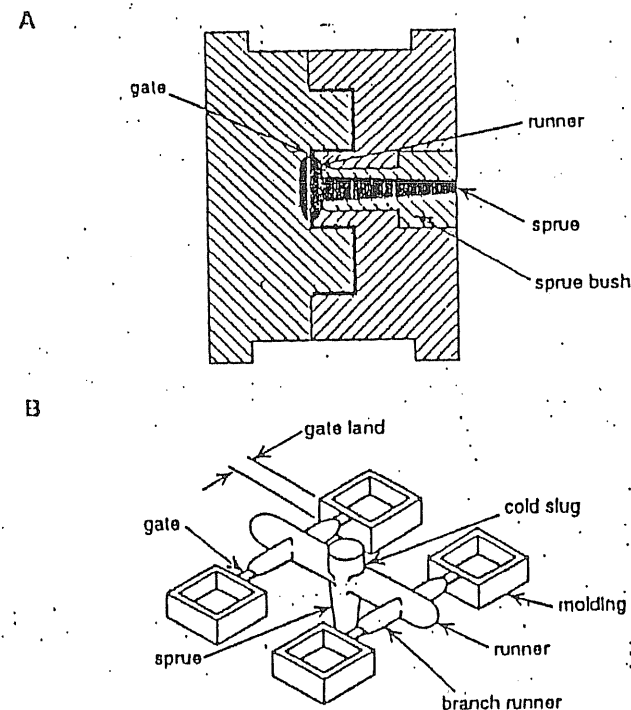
A. Typical mold design used in a 'multiimpression injection molding process for the production of plastic boxes in this example. B. Removed mold assembly showing boxes and plastic scrap (i.e., sprue and runners). (Adapted from N. G. McCrum, C. P. Buckley, and C. B. Bucknall, *Principles of Polymer Engineering*, Oxford University Press, Oxford, 1988, by permission of Oxford University Press.)
